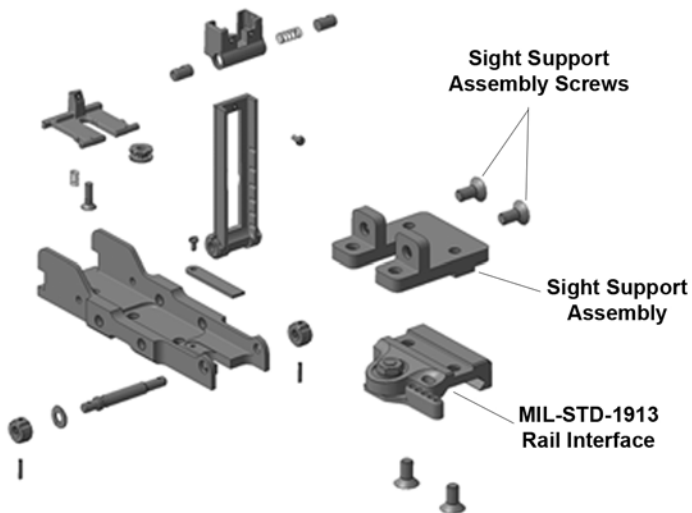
Changing Leaf Sight Mounting Configuration.
